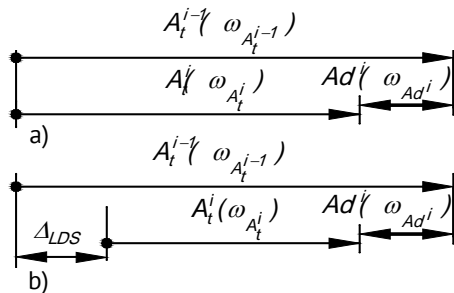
Target transformation of the technological size by removing the machining allowances: a) from only one locating datum surface; b) with the change of locating datum surfaces.
